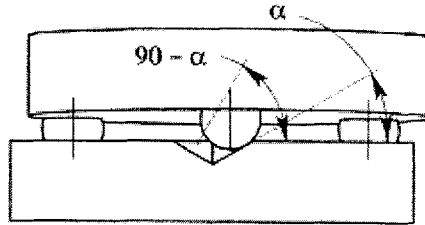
Kinematic coupling with five constraints engaged [13]
